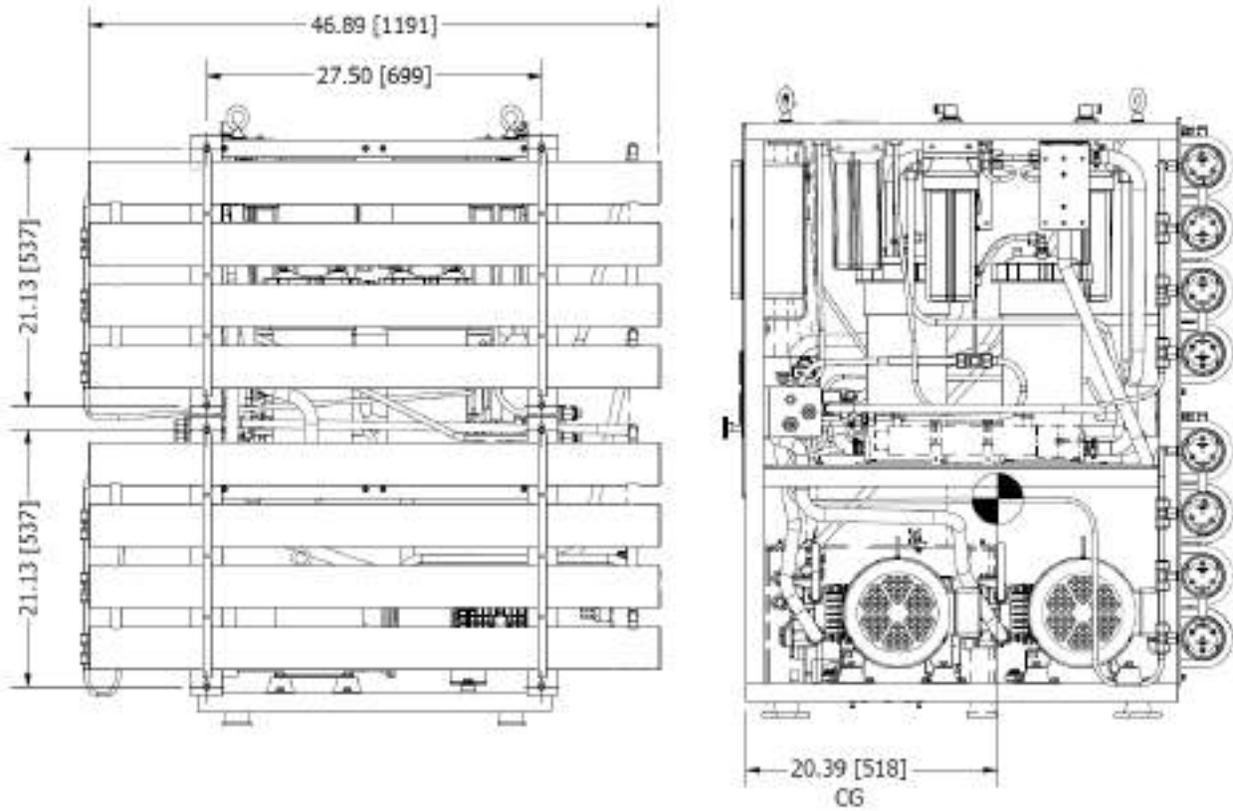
5200 & 6800 GPD RO System Dimensions
